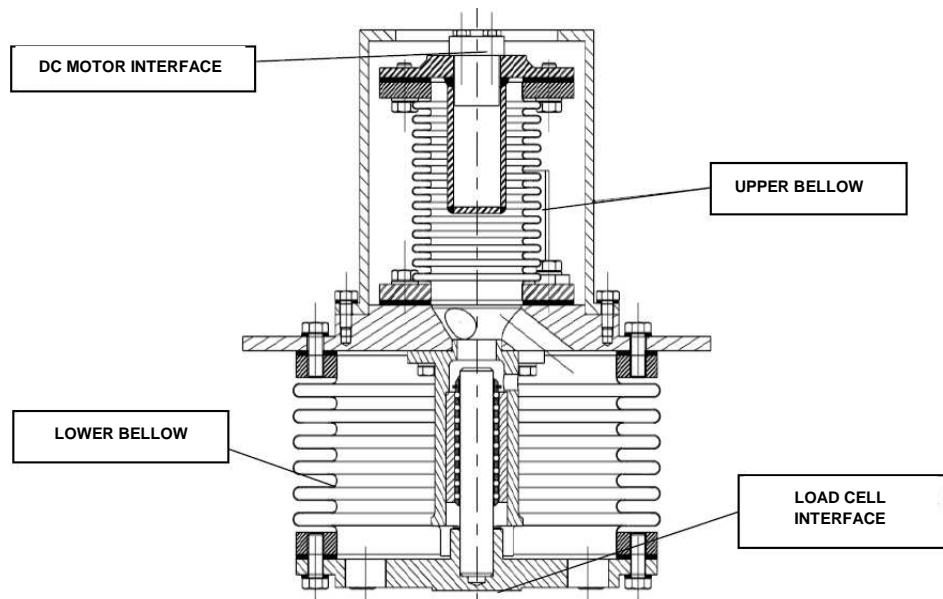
The Diaptometro main mechanical parts [79]: section view of the hydraulic actuator adopted by the *Diaptometro* for the indentation head handling. The mechanical bellows and the interfaces with the load cell and the DC motor are outlined.
